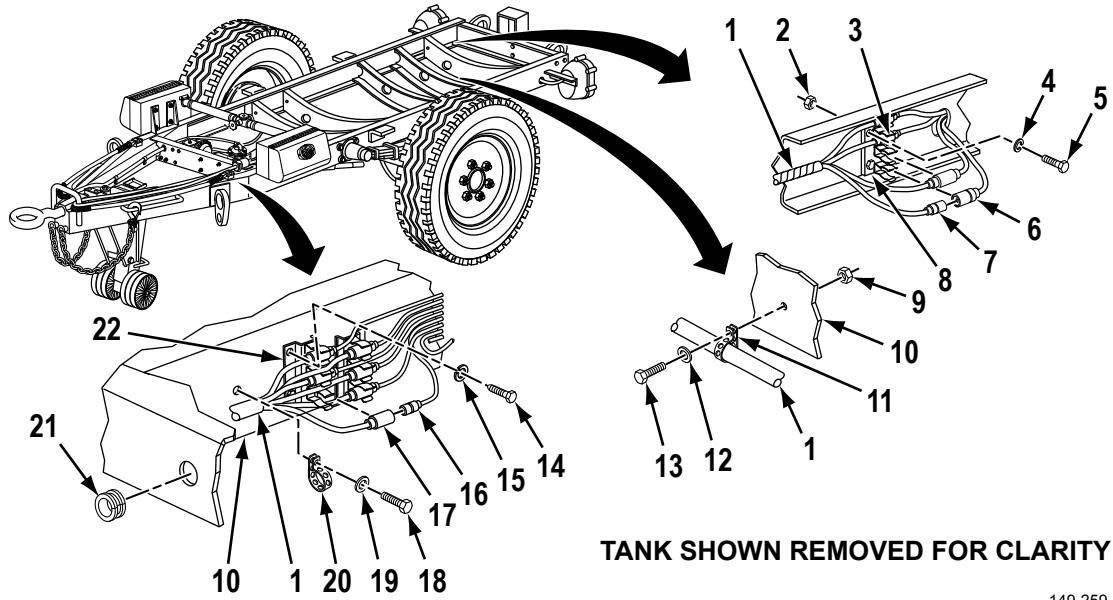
Chassis Wiring Harness Electrical Connectors Removal.
